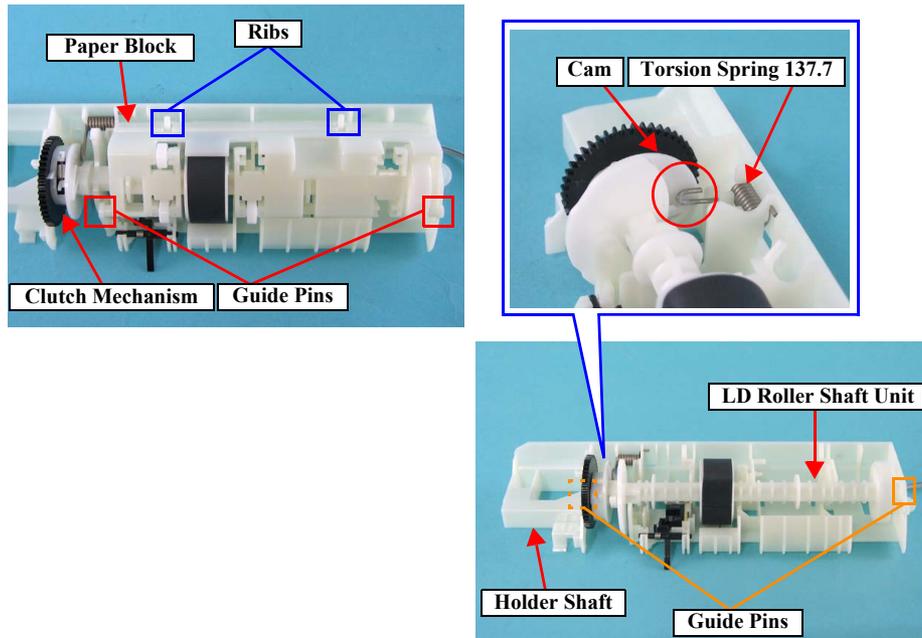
Removing Spur Gear 36.8/Extension Spring 0.143/Clutch
